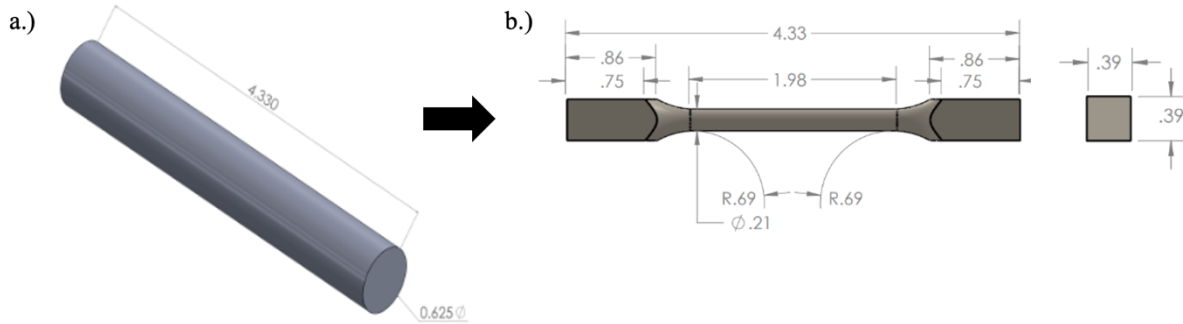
Specimen geometry of the vertically built samples (Z), in inches, a.) as-printed, and b.) after machining.
